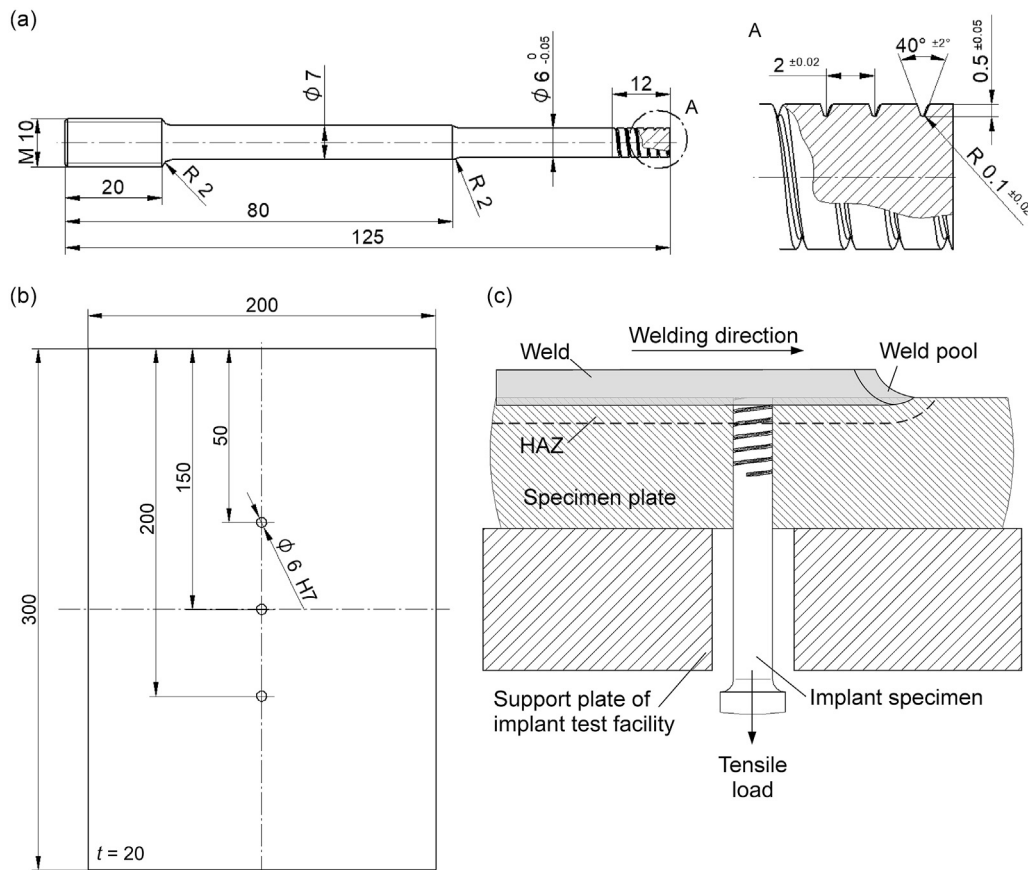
Schematic illustration of the implant test: (a) geometry of the implant specimen with detail of spiral notch, (b) geometry of support plate (c) test configuration; all dimensions in mm.
